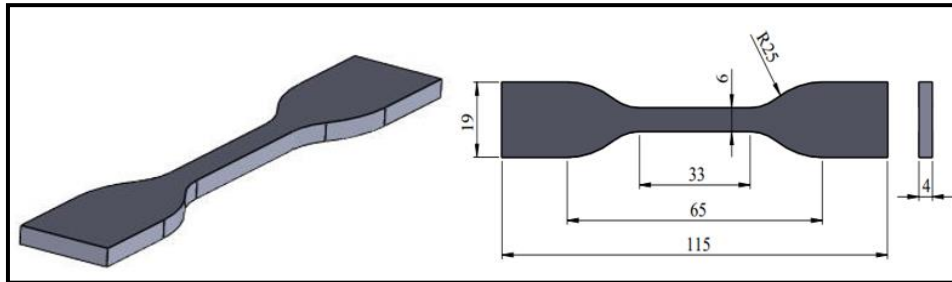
Dimension and shape of specimens utilized for tensile test (dimensions are in mm)
